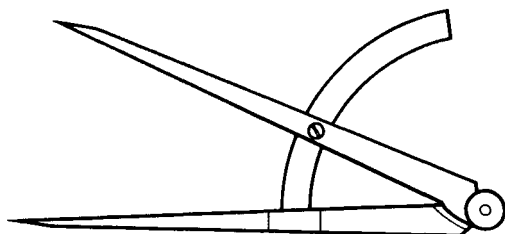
Wing compasses have one leg pointed and the other a flat cutting edge.
